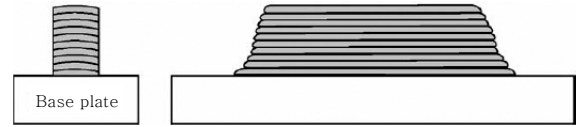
Weld pad built up by SMAW used to obtain martensite weld metals<sup>27)</sup>
